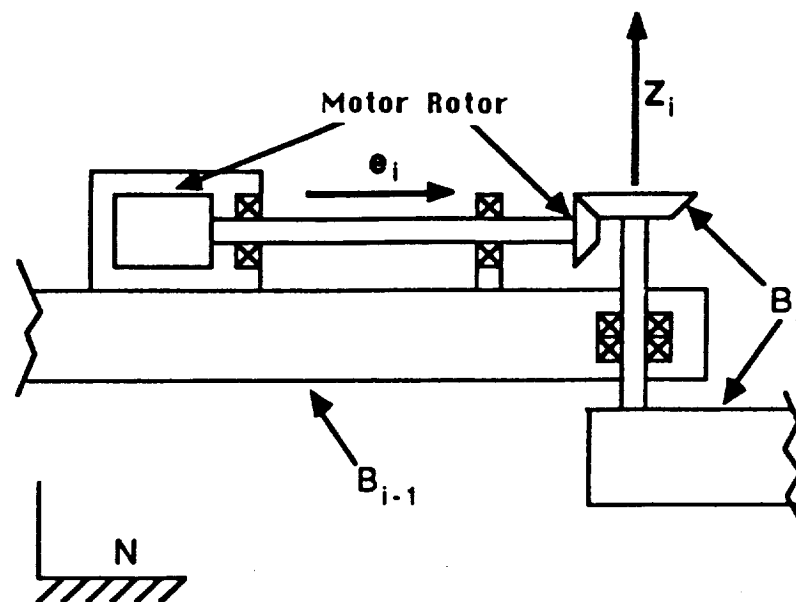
Motor Rotor and Gear Reduction Mechanism
